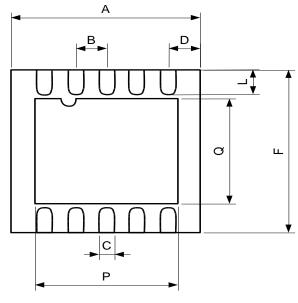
DFN(3x3)-10 Package dimensions (bottom view). Note that the saddle needs to be connected to common GND on the PCB.
